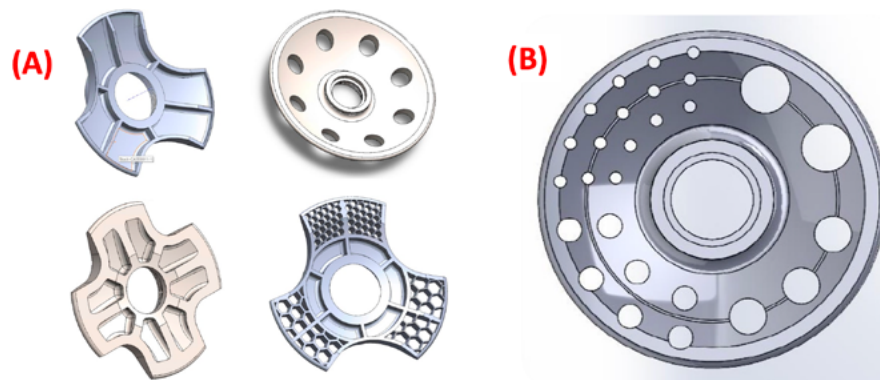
(a) Example boss designs based on parameters optimized for rotational molding, (b) Example of a boss design for identifying the optimum hole size for molding.
